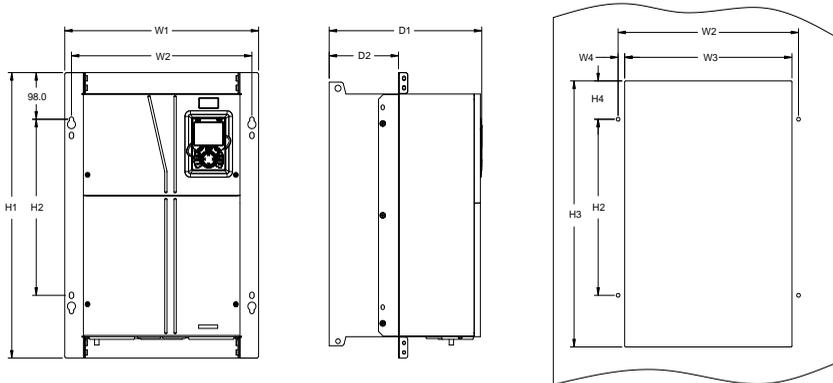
Flange mounting diagram for 380V 90–110kW models
